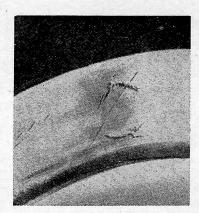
A double fracture caused by the tyre being crushed between the rim and an obstacle, such as the edge of a kerb.
